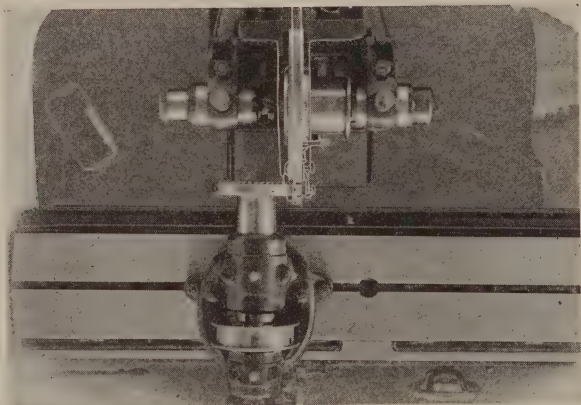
Face grinding using face chuck shown in section in Fig. 297.
